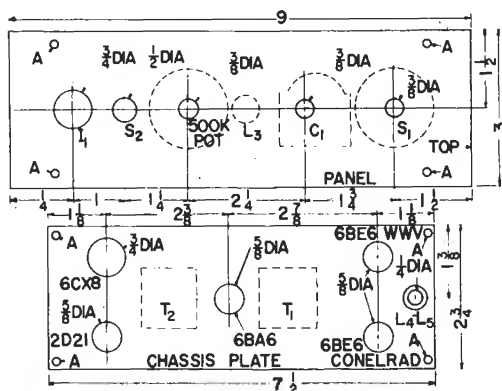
PANEL AND CHASSIS parts layout for the Conelrad monitor. The IF transformers on this model are $1\frac{1}{8}$ inches square. The 6BE6 mixer tube for the Conelrad receiver can be centered on the chassis plate if the 6BE6 WWV converter tube and L_4 – L_5 will not be included in the unit.
